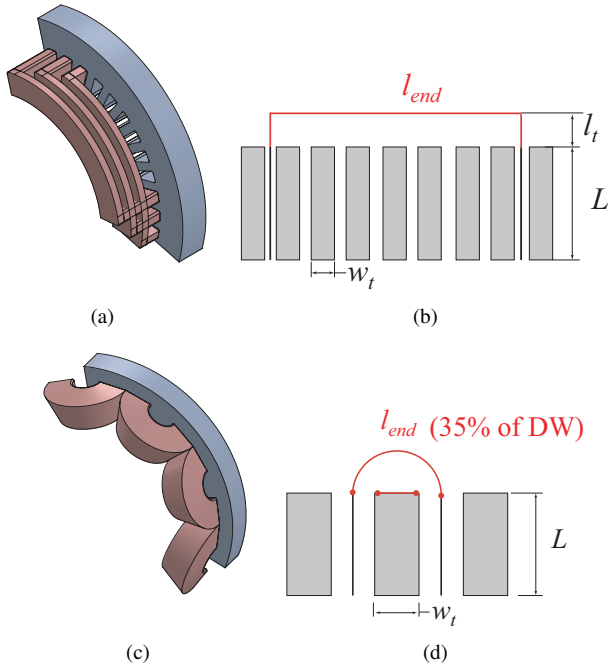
a) 3D view of the end winding connection according to (4); b) upper view of $q=3$; c) 3D view of $q=1/2$ end winding connection; d) upper view of $q=1/2$
